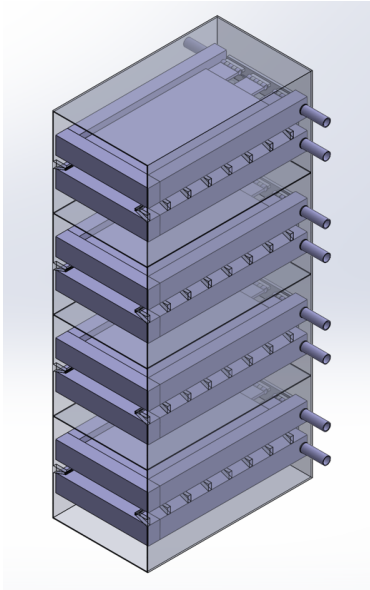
A stack of four iPEBBs inserted into a NiPEC section using the proposed latching mechanism.
